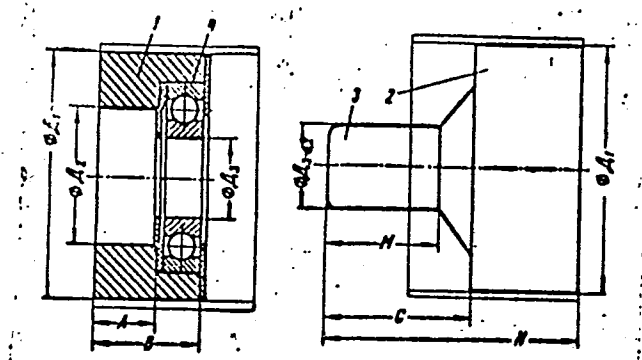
Device for friction welding of thin-wall pipes.
